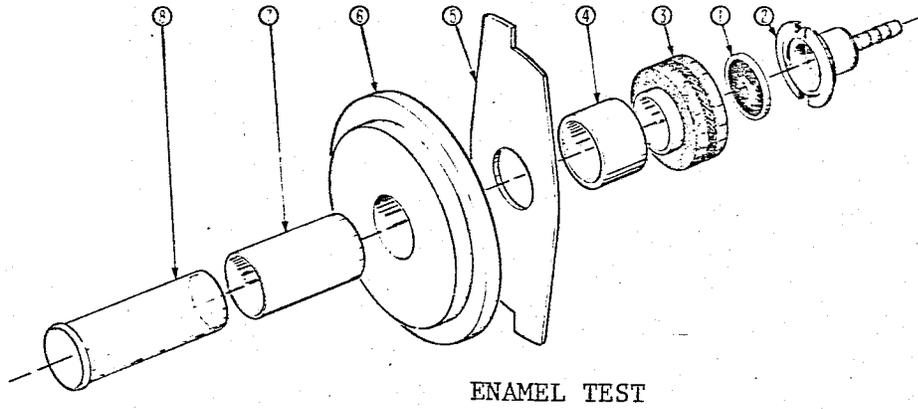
CONSTRUCTION LAYOUT OF SAMPLE HOLDERS AND CARTRIDGE
